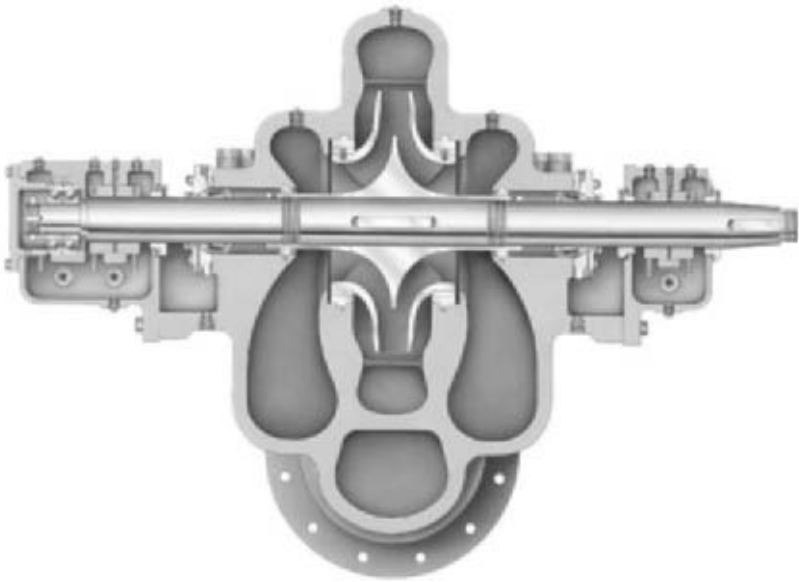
Single-stage double suction, axially split pump (Flowsolve Corporation)
